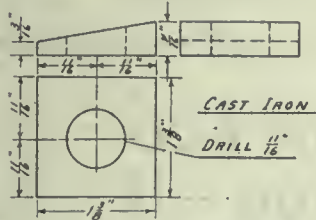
CHANNEL OR "I" BEAM FLANGE WASHER.
